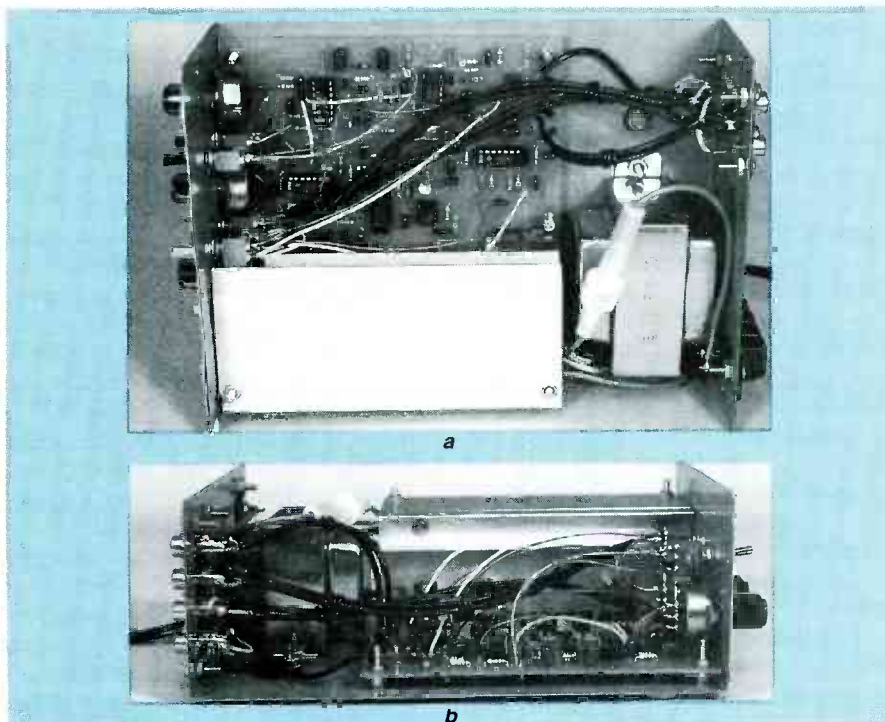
THE HEAT SINK AND PC BOARD are installed as shown. Two 3-inch screws with double sets of nuts are used to mount the PC board on one side and hold the top of the heat sink in place (a). Two shorter screws hold down the other side of the board (b). Be sure to use spacers to prevent the board from touching the metal cabinet.
